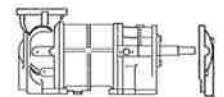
Checking 'O' ring and cap seal of unloader piston
